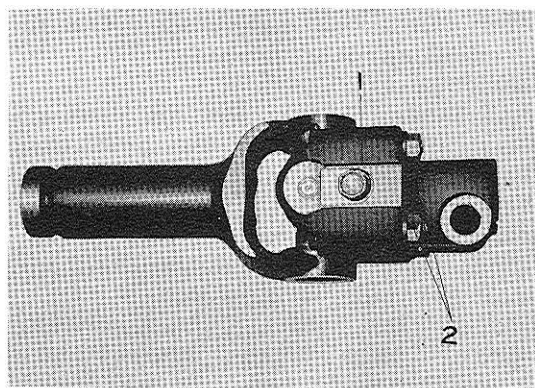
Inter-mediate Shaft V5130 Disassembly
